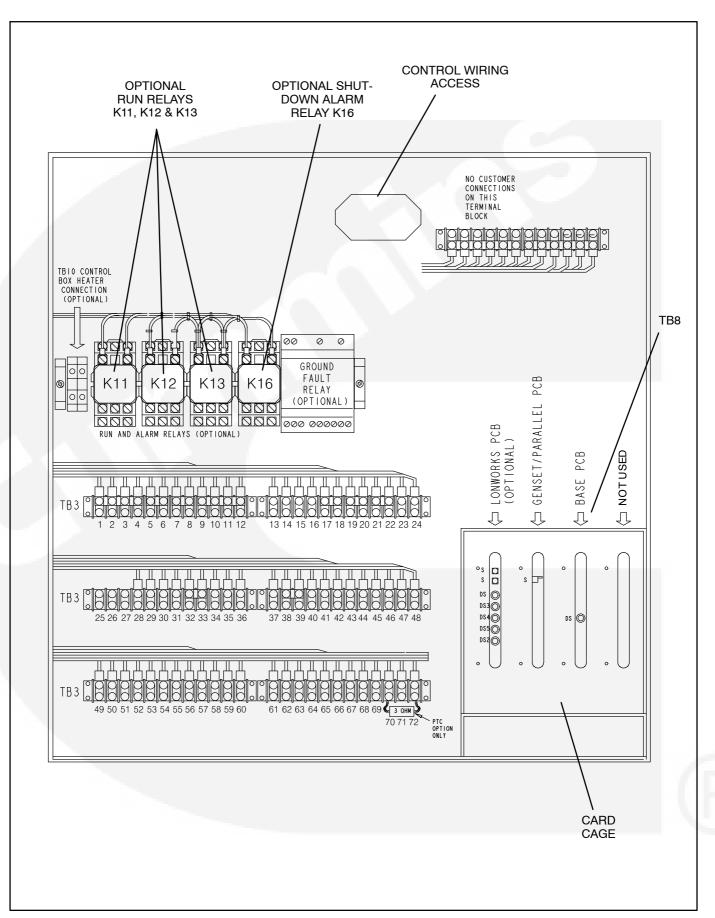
CONTROL BOX ASSEMBLY INTERIOR
